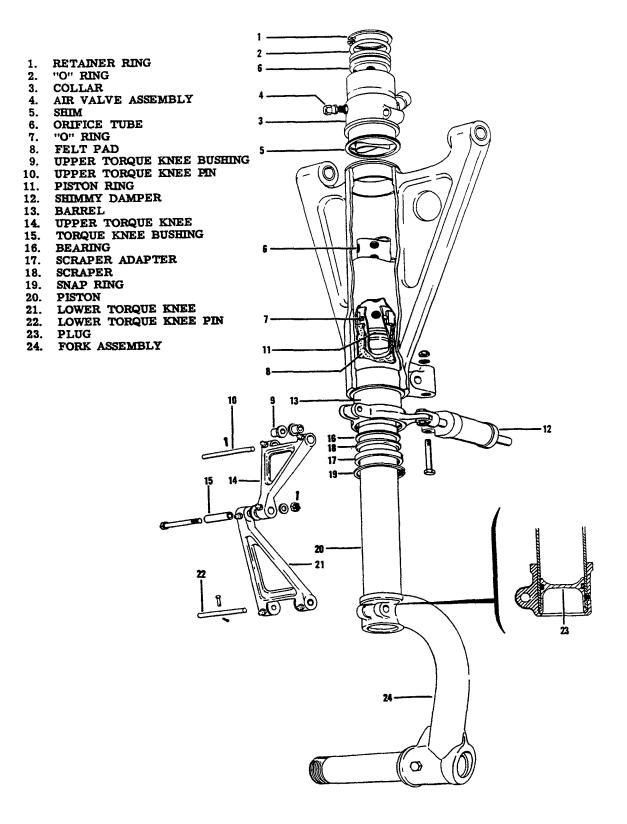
Nose Gear Shock Strut (Serial D-6562 and After)
